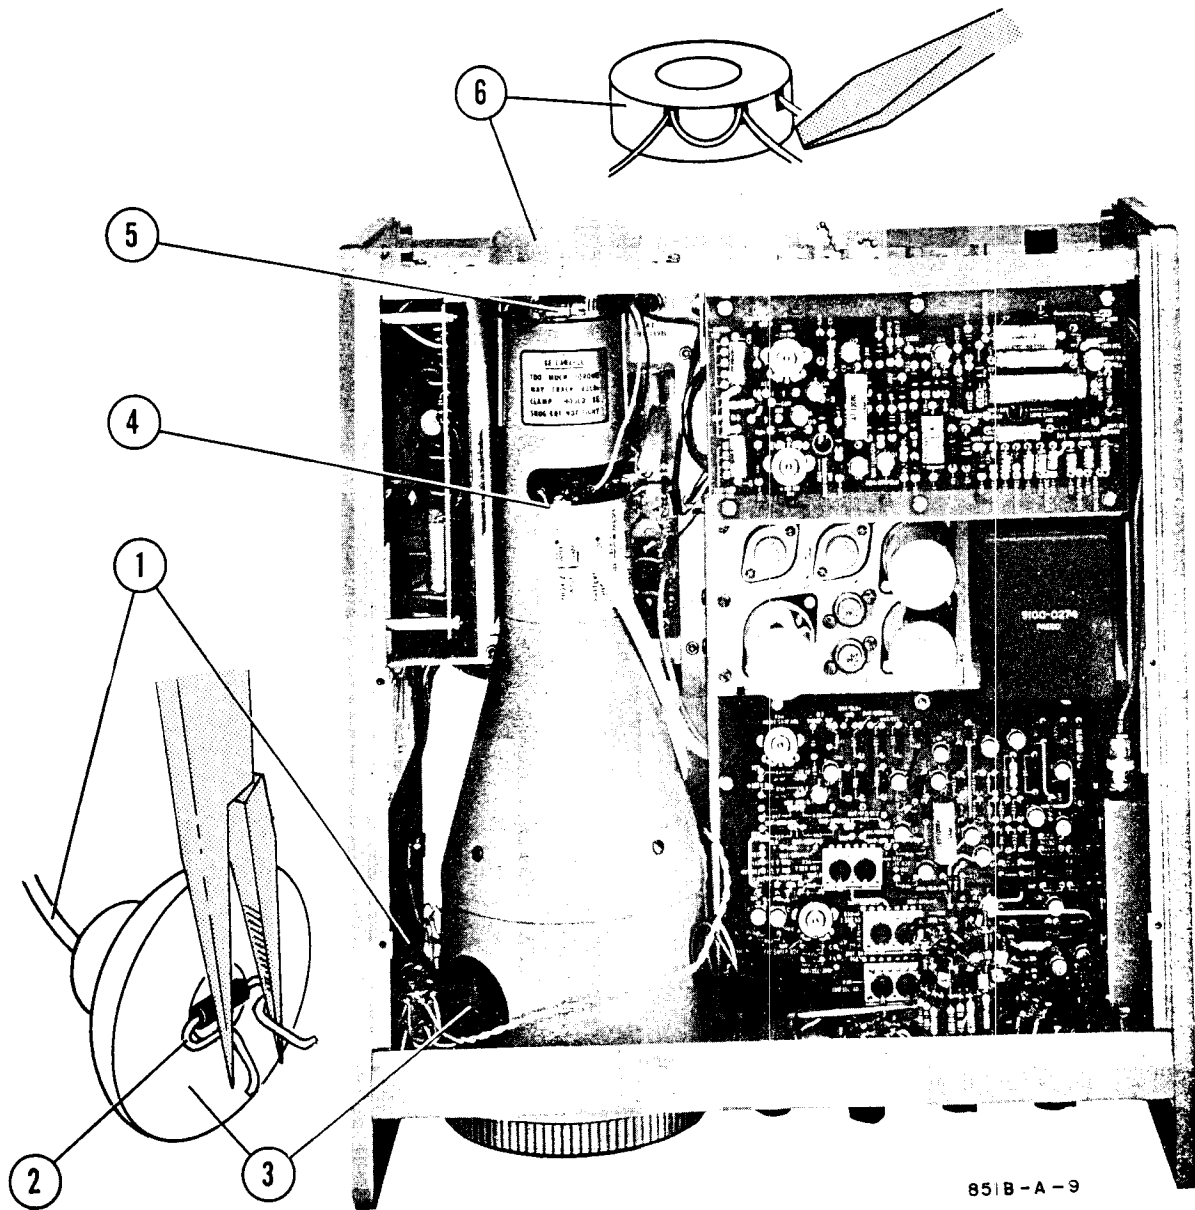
Cathode-Ray Tube, Parts and Connections Involved in Removal
